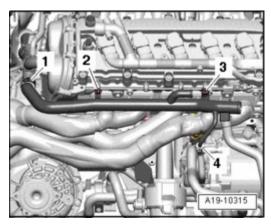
Removing Bolts, Loosening Hose Clamps And Removing Right Coolant Pipe From Coolant Hoses
